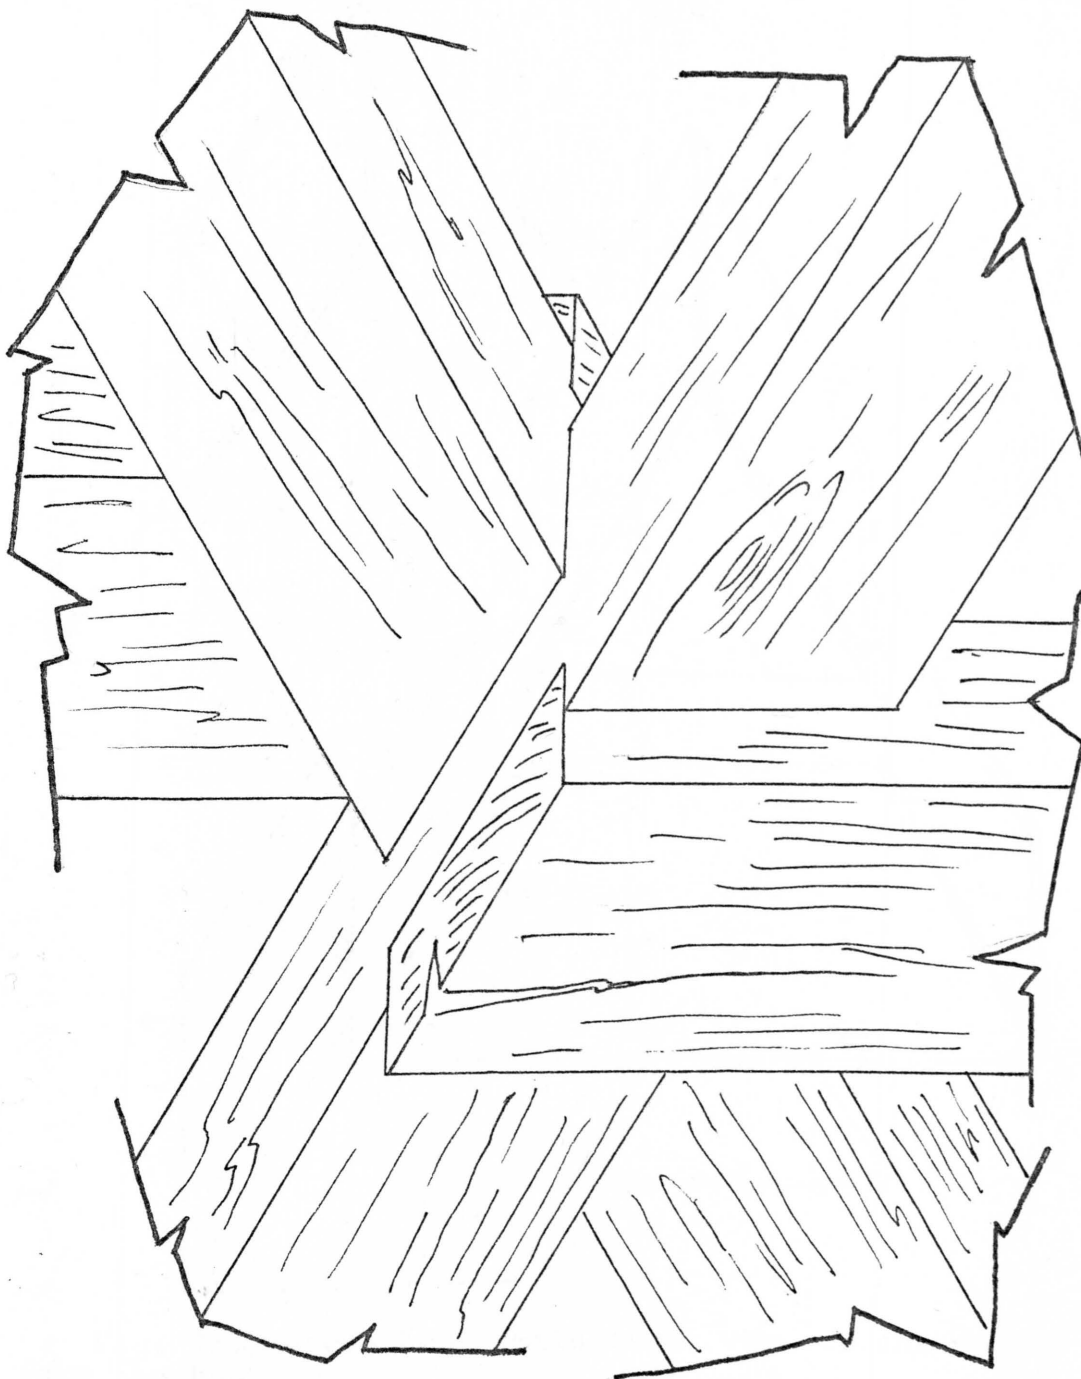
Assembled oak components. The three lengths of oak were assembled to form a six armed figure.
